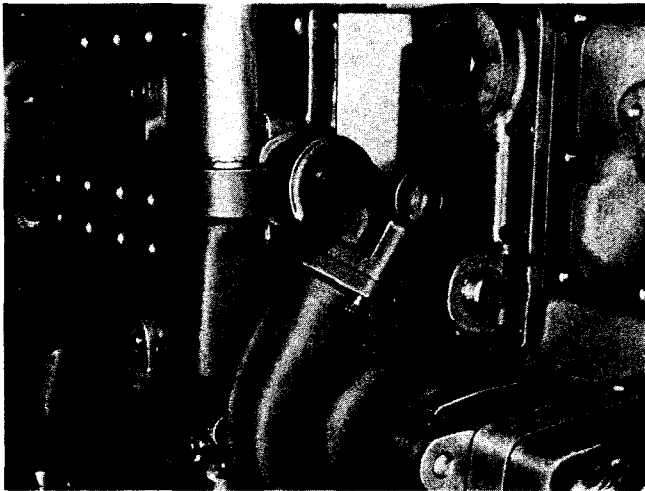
, (K11949). Lubricating system priming point — KT(A)-1150 Engine
